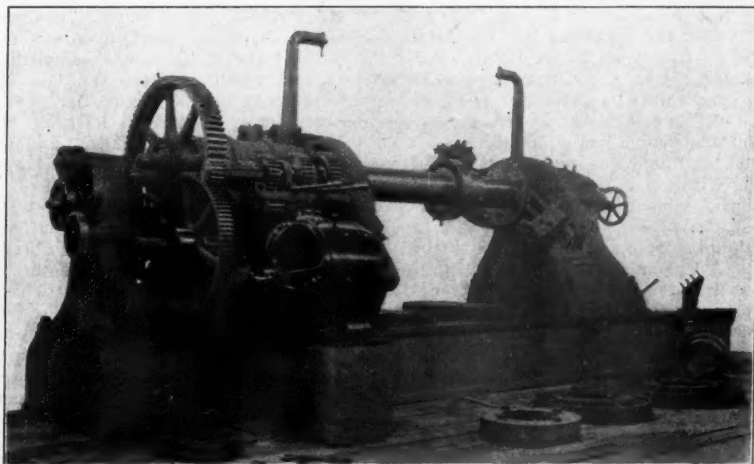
The Niles-Bement-Pond Cylinder Boring Machine.
